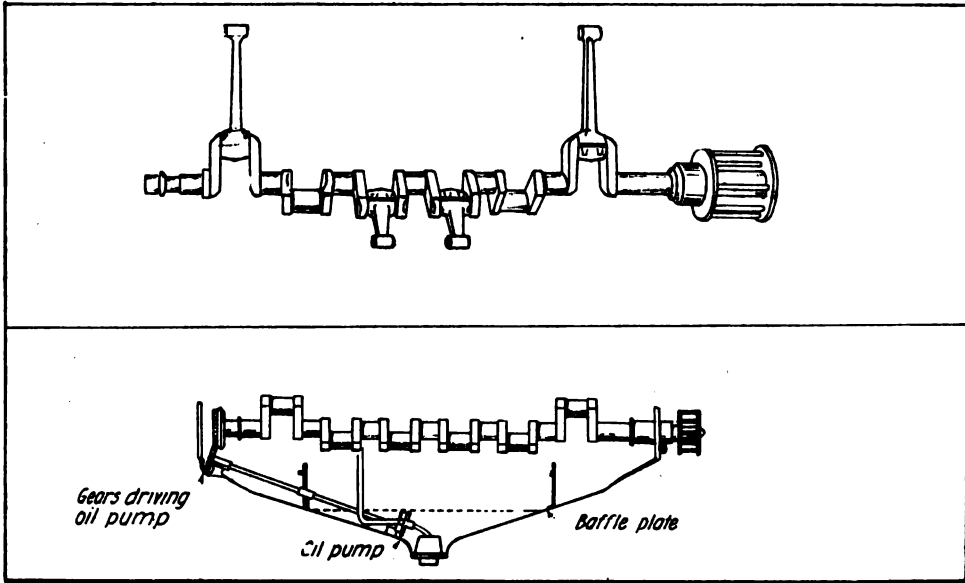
(upper)—Crankshaft of 6-cylinder engine
